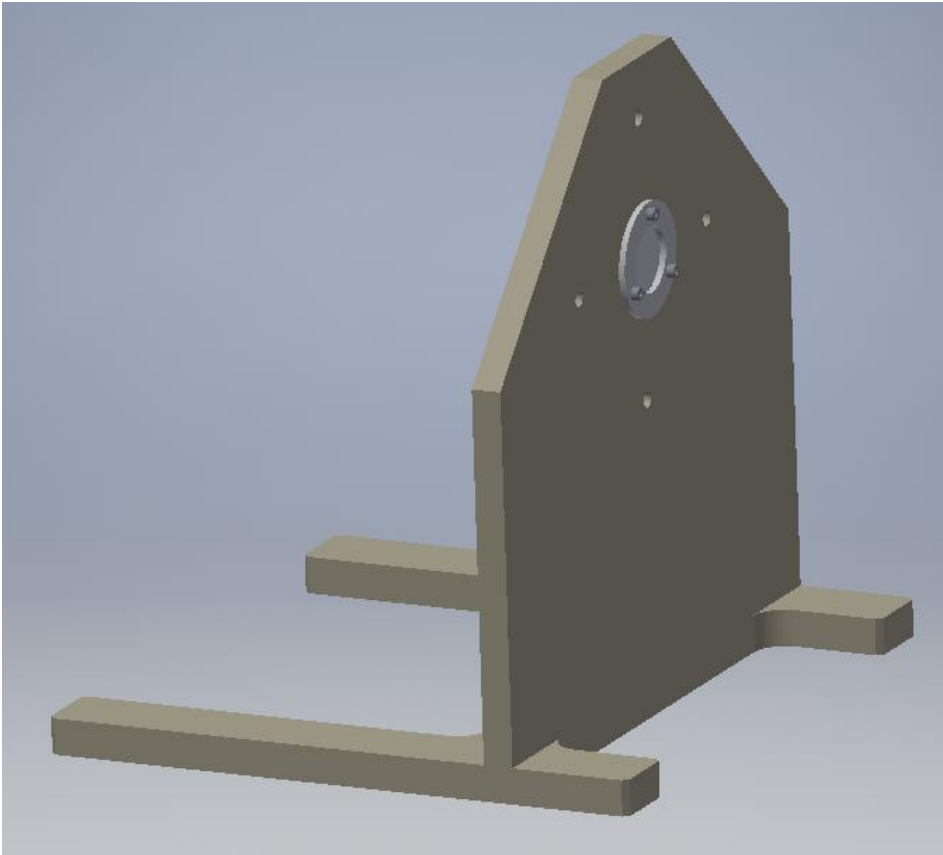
The assembled camera-mounting bracket including the filter retainer.
